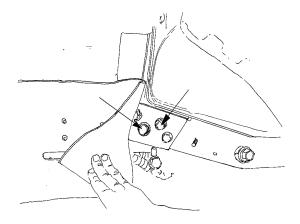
Fender Extension Flap Mounted to the Cab Bracket- Arrows Indicate Bolts (2) To Be Used
